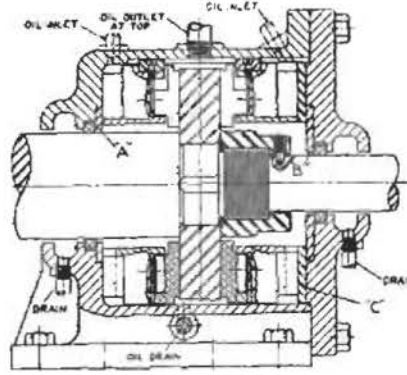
Simple mounting for double horizontal thrust bearing. Forced lubrication is used, with two inlets and one outlet. Base flange is provided for attachment.
